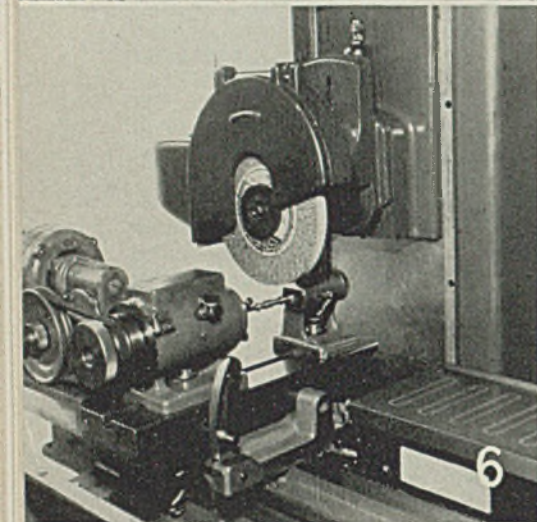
When deliveries threatened to hold up war production, the tool room of this former stamping shop designed and built this precision cylindrical grinder. It is convertible to a surface grinder. It works so well the company is now building 20 more units for other subcontractors doing the same work, has a number in use itself
